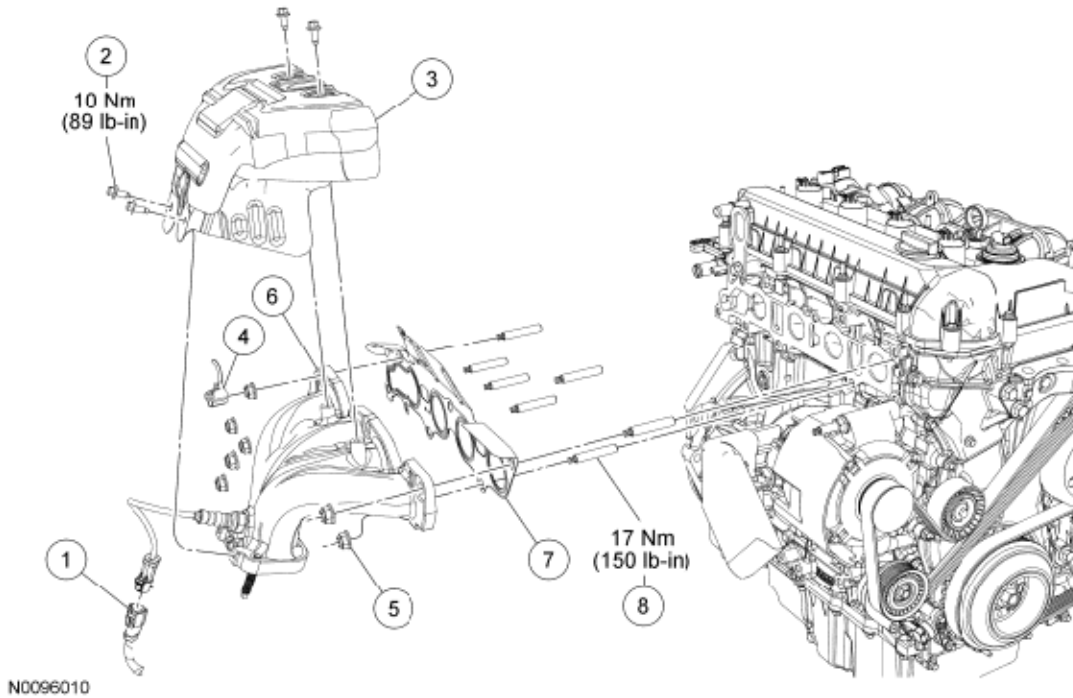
Identifying Exhaust Manifold Components With Torque Specifications
